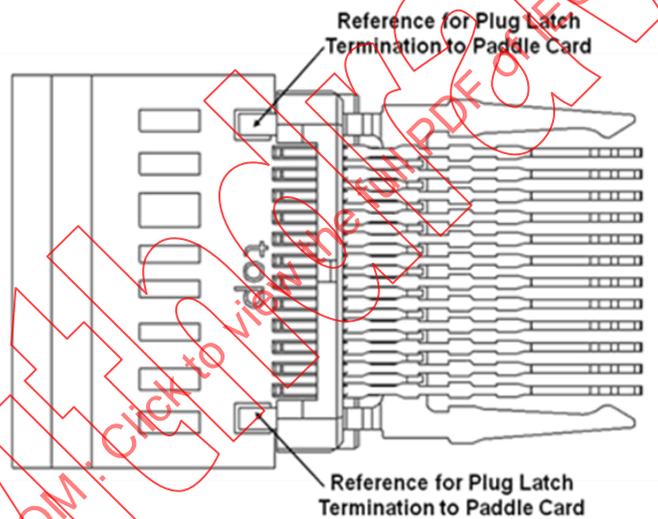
Illustration of the Latch Soldered to the Paddle Card Ground
